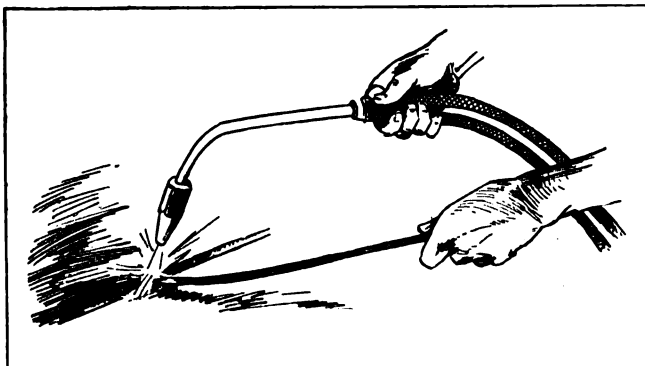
Correct method of holding torch and motions which may be used in welding
